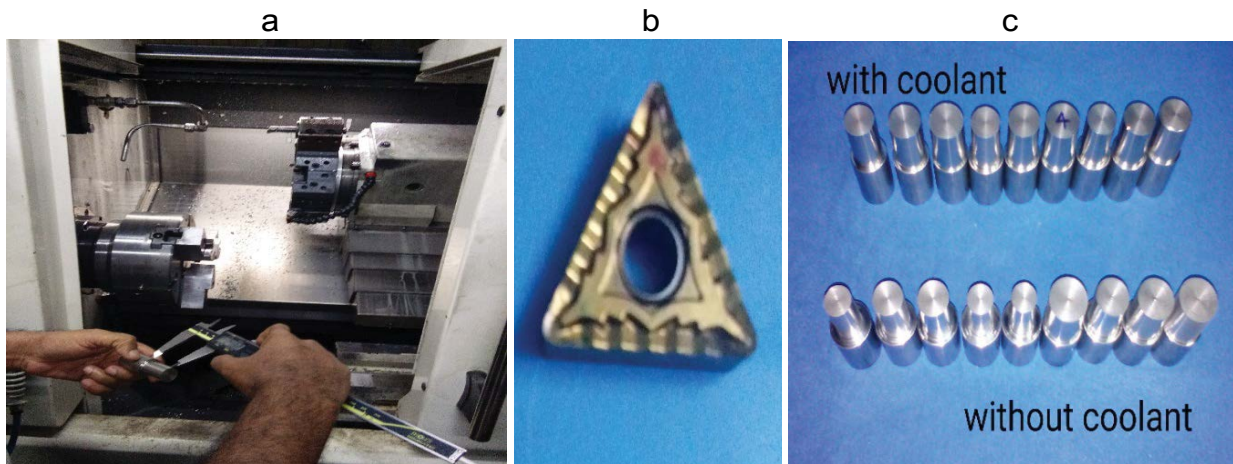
(a-c) Shows experimental setup, cermet insert and machined component.
